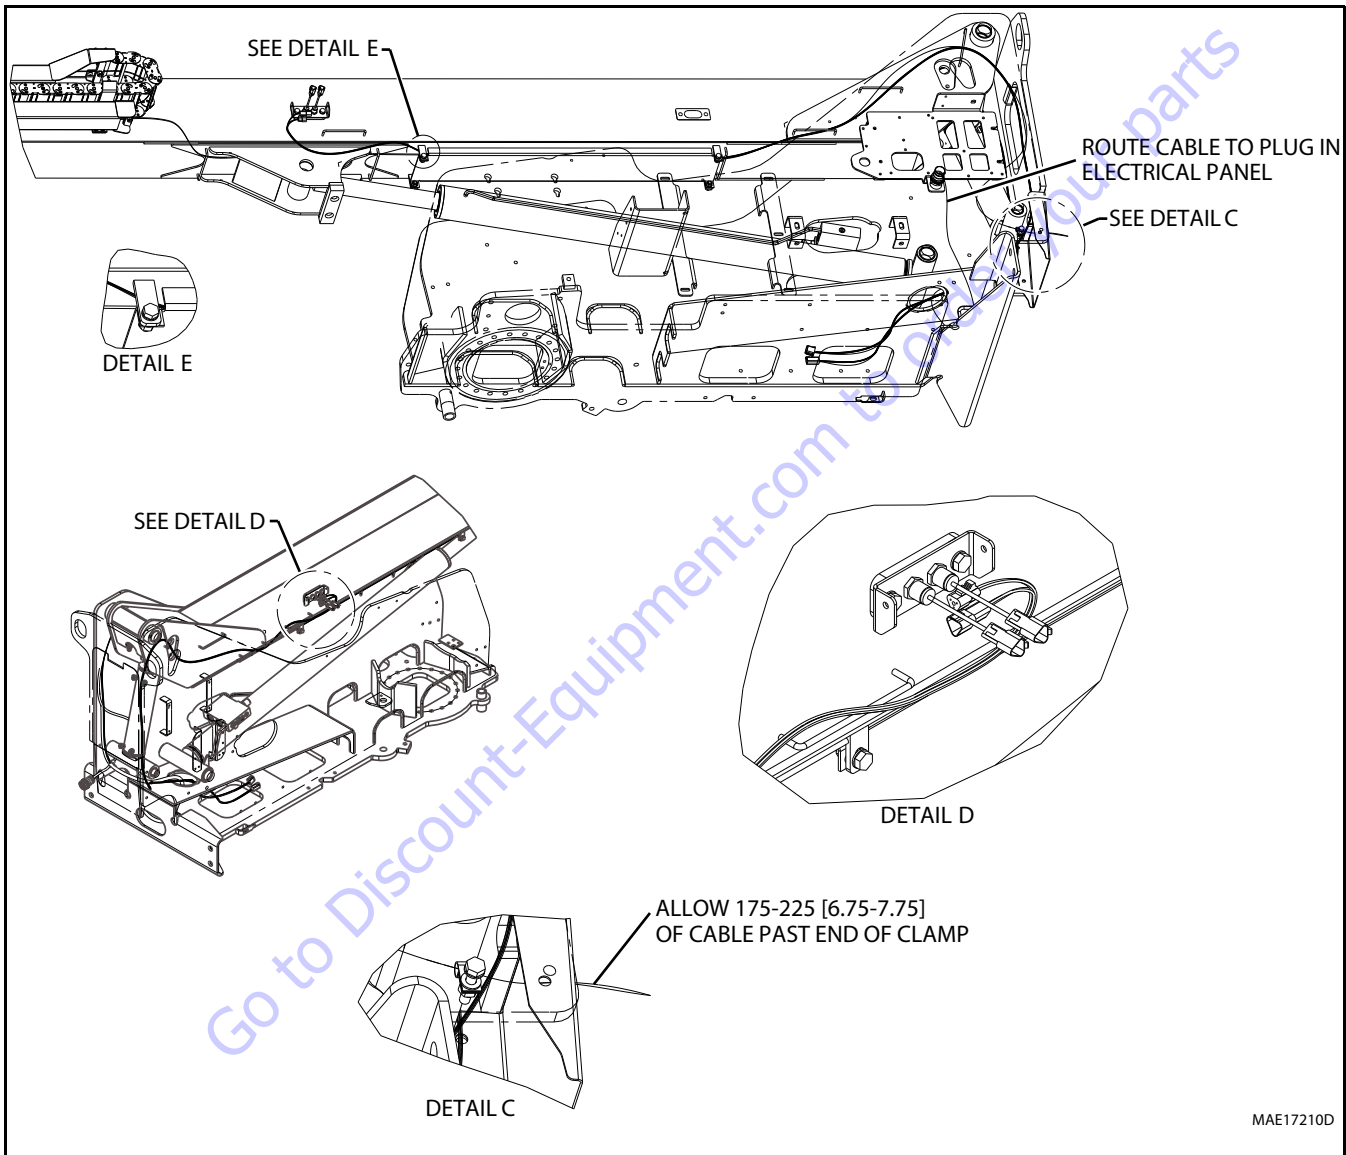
Cables and Clamps Installation - 400SC (Sheet 2 of 2)
